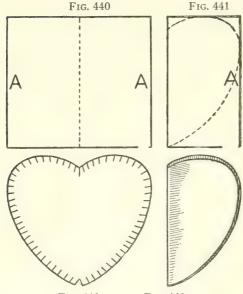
Fig. 442 Figs. 440 to 442.— Details of Basket Shown in Fig. 439
